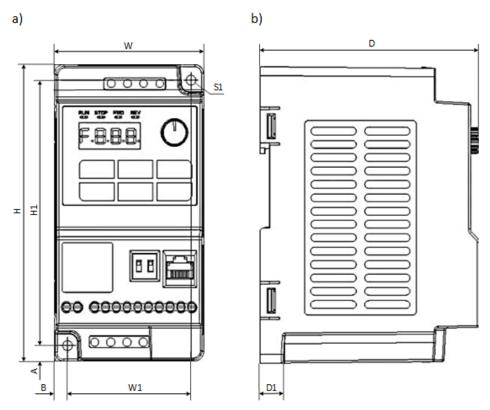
Two-view drawing – FS1: a) Front view b) Side view
